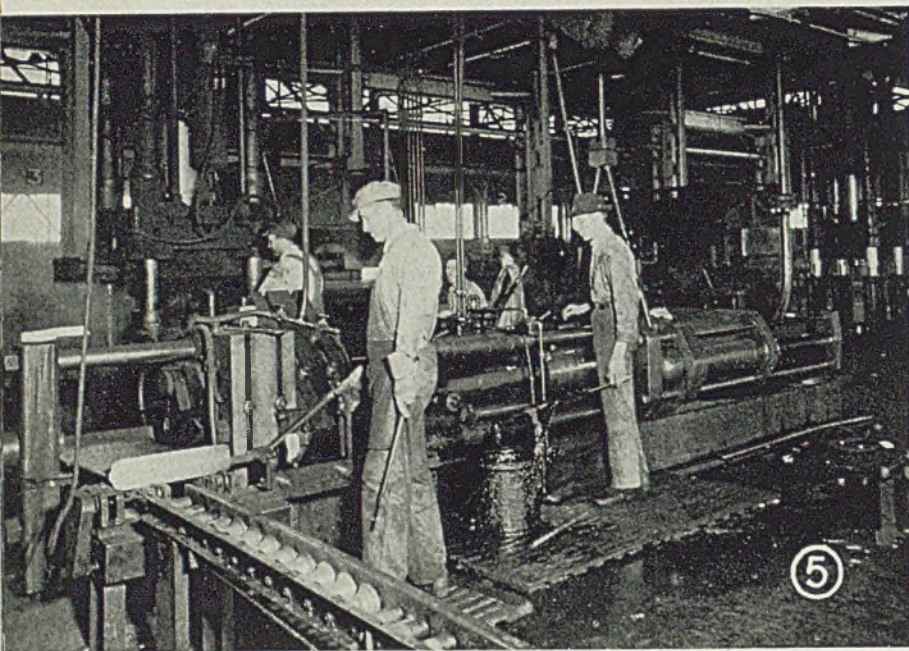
Lansdowne designed and built, this horizontal two-stage roller drawbench has combination air and water drive, quick-acting compressed air drive being used for nonworking parts of stroke. High pressure water does actual drawing. Shell bodies are checked for concentricity and length immediately on emerging from draw
